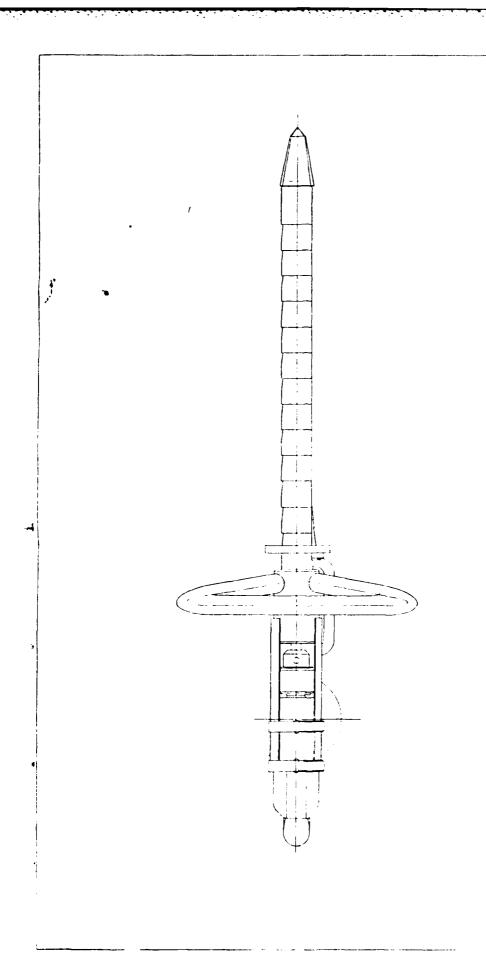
Plan View, Penctrator/Agent Applicator Assembly.
